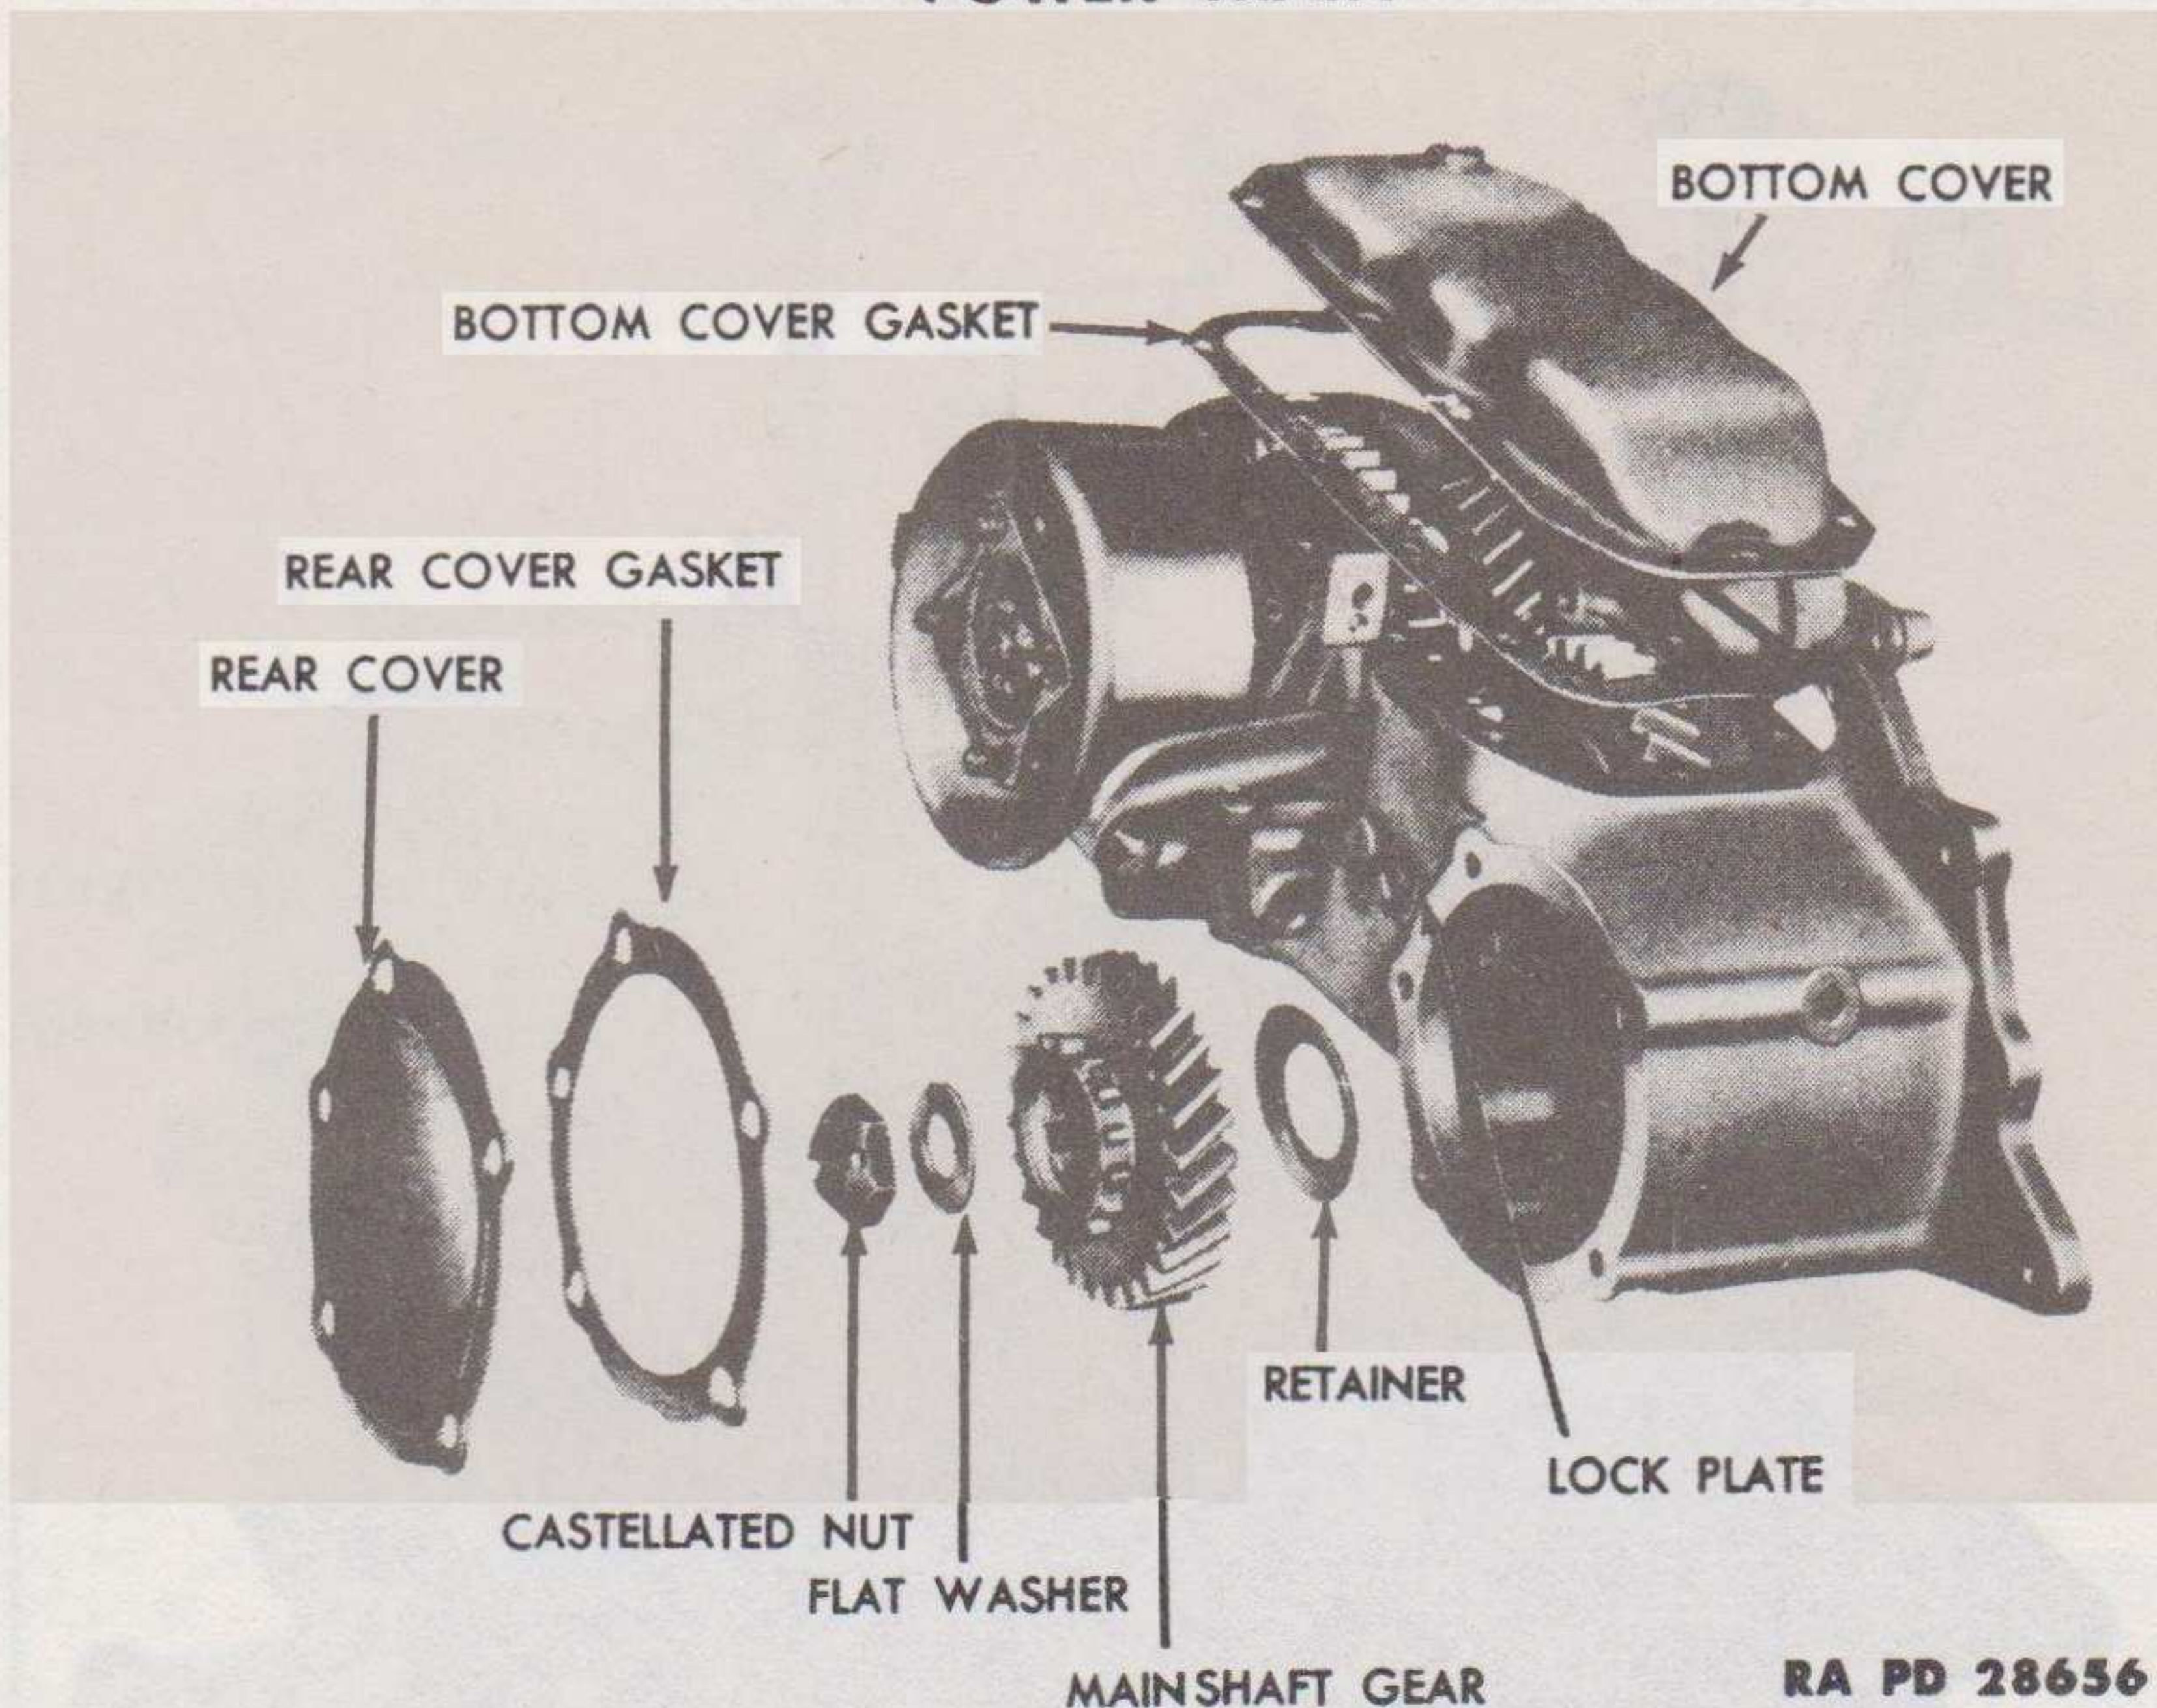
Bottom Cover and Mainshaft Gear — Exploded View
